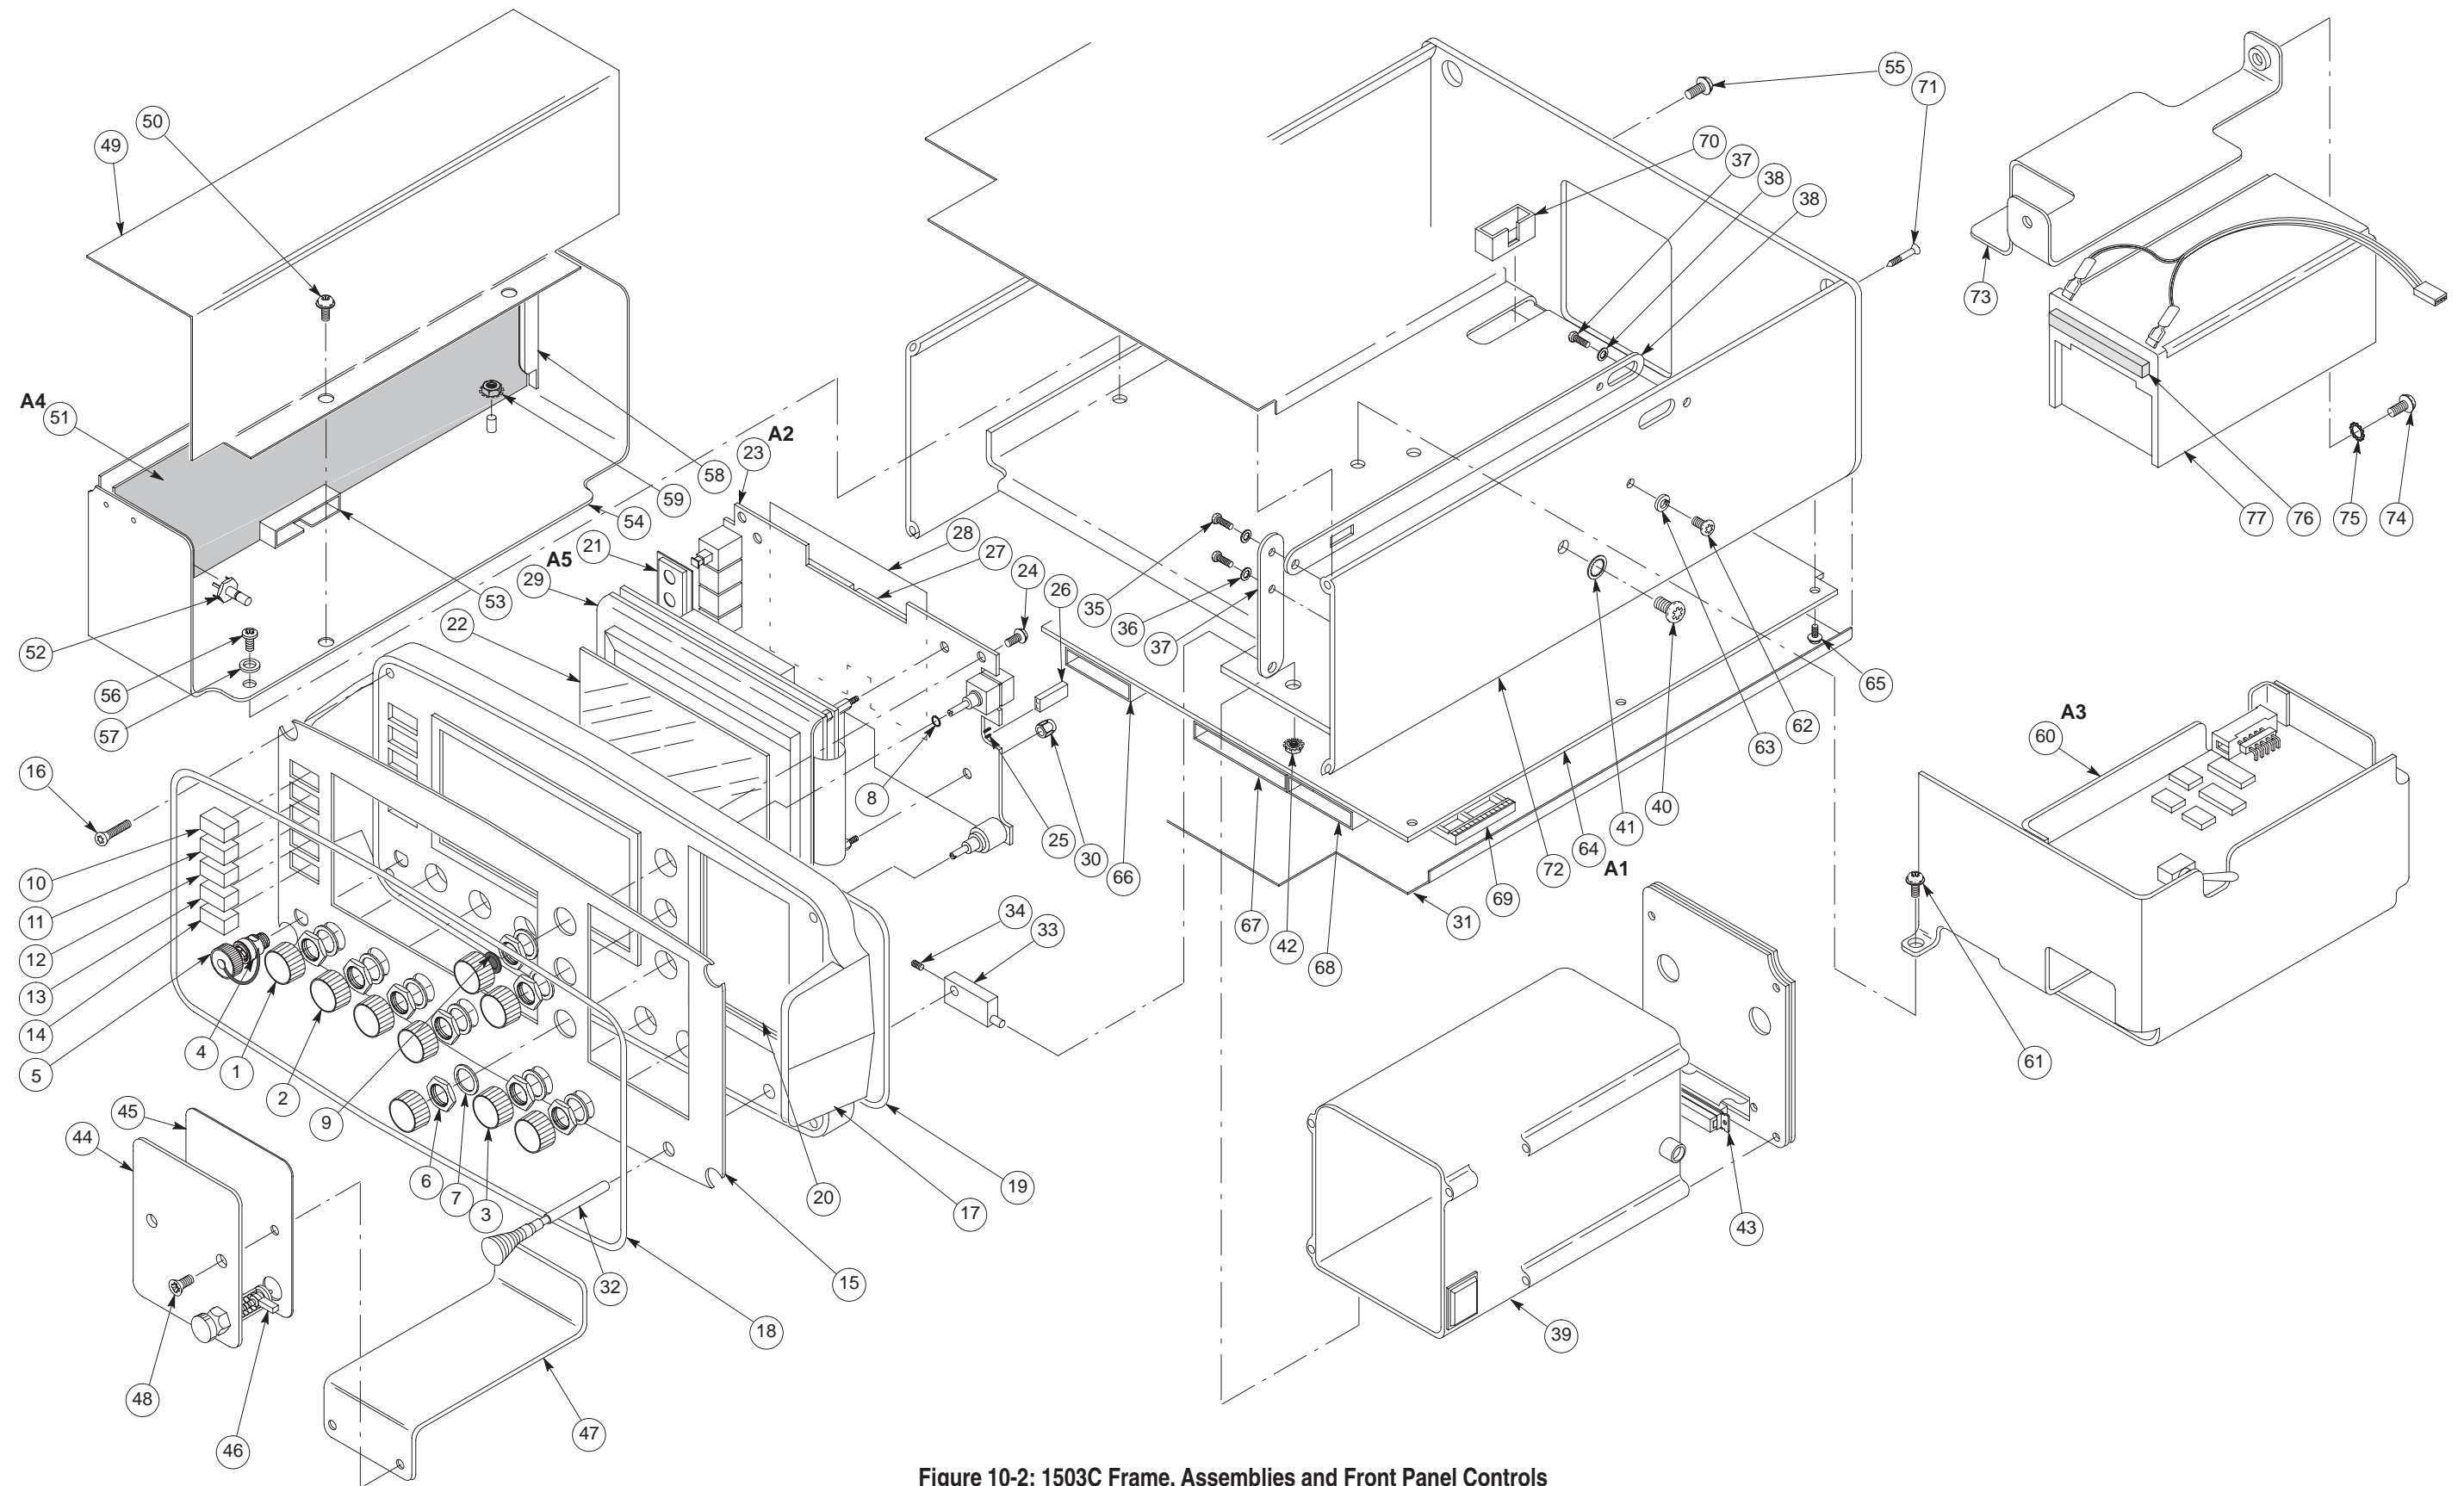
1503C Frame, Assemblies and Front Panel Controls
